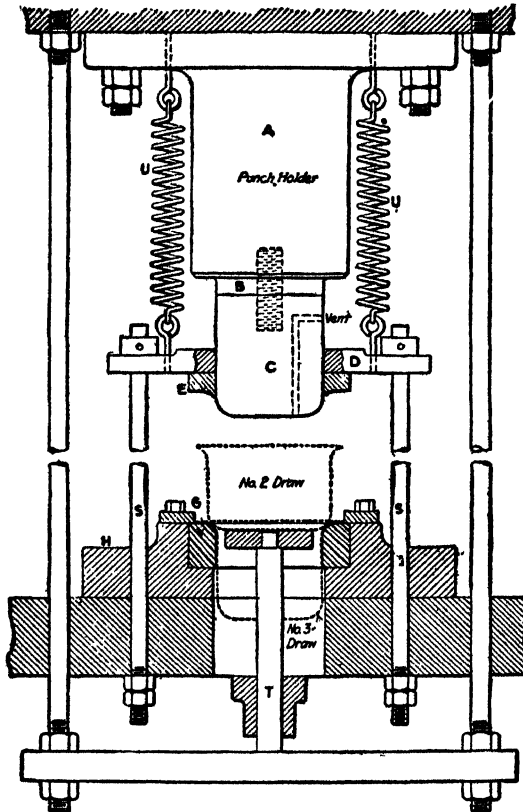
Arrangement of the dies for drawing shells shown in Fig. 25.
